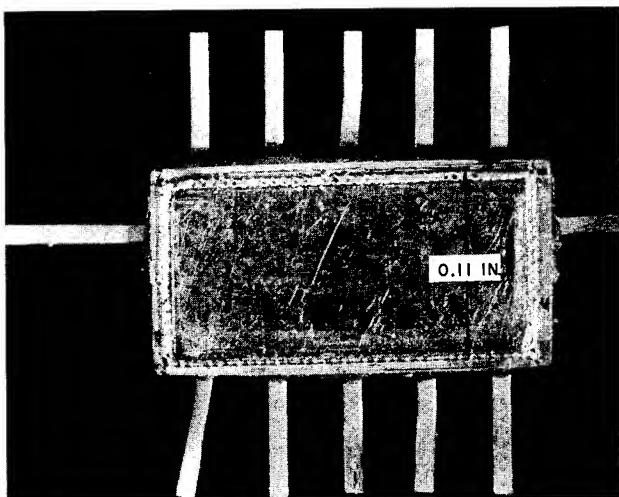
Typical electron beam welds on FEB packages.
